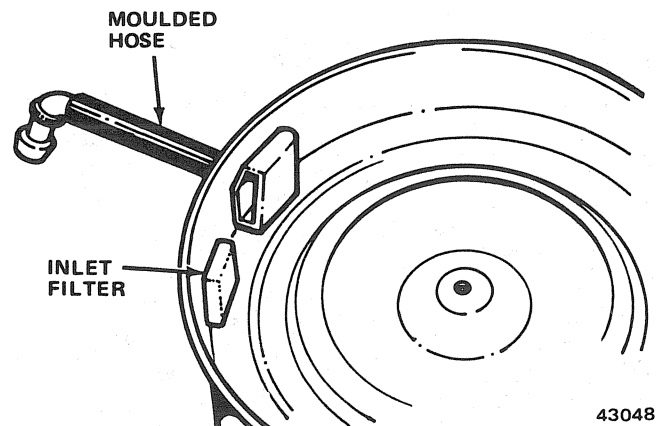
A-11 PCV Air Inlet Filter—Four- and Six-Cylinder Engines
